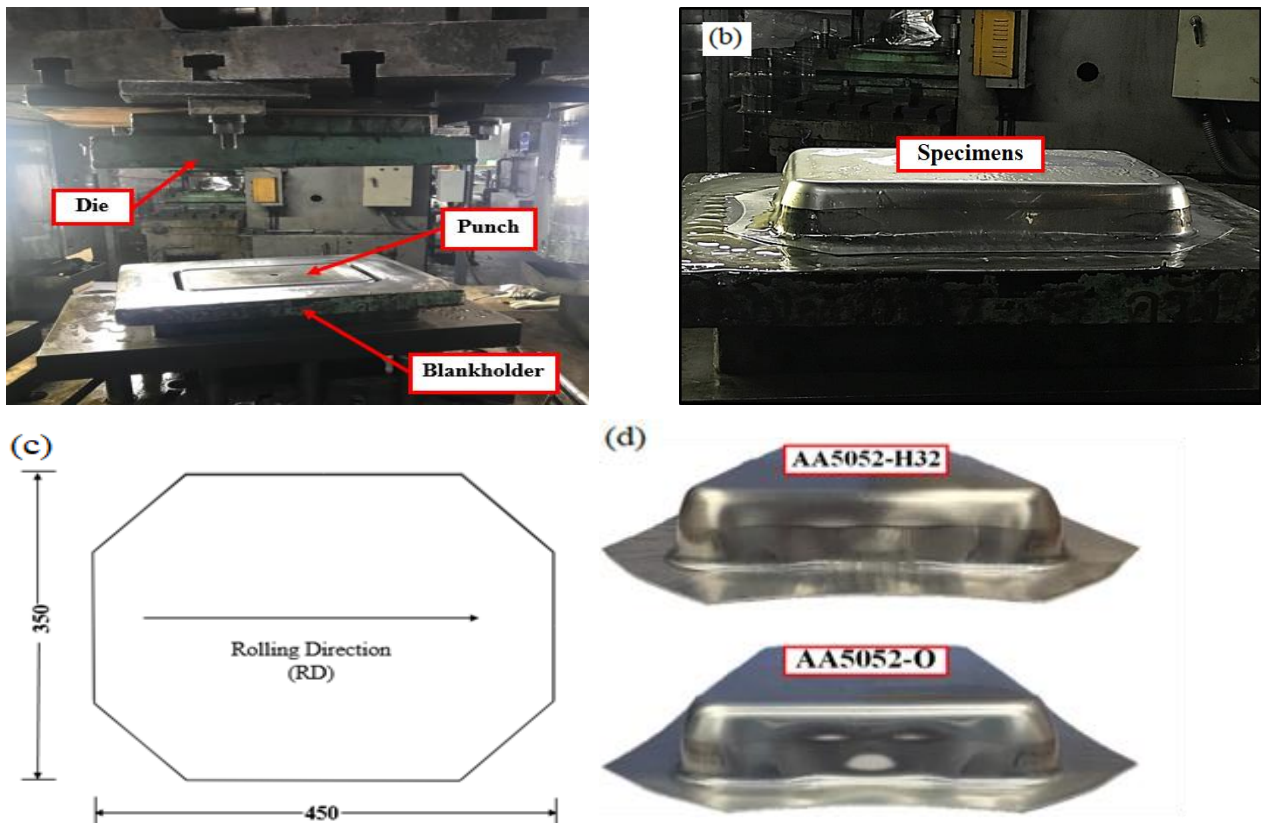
(a) Experimental Set-Up (b) Rectangular Cup Drawing test on hydraulic press machine (c) Dimension blank sheet (d) formed specimen.
